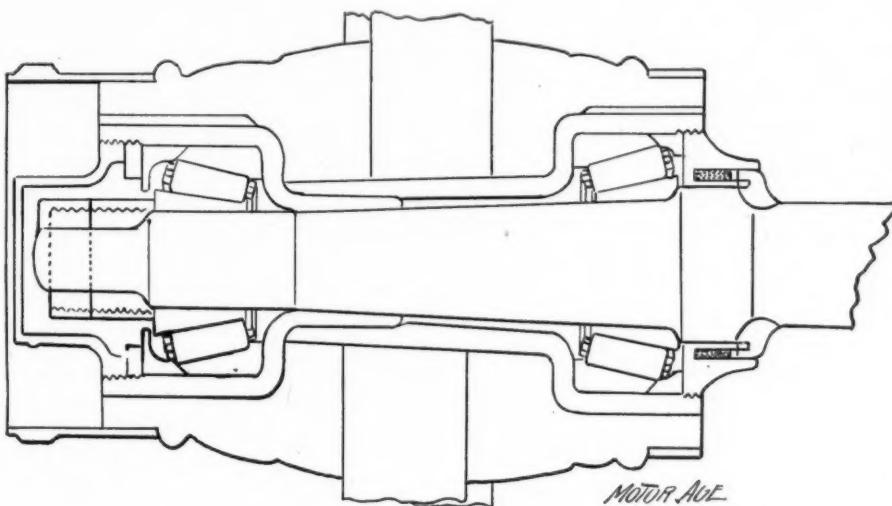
SECTIONAL VIEW OF A ROLLER BEARING HUB FOR WOOD WHEEL.
